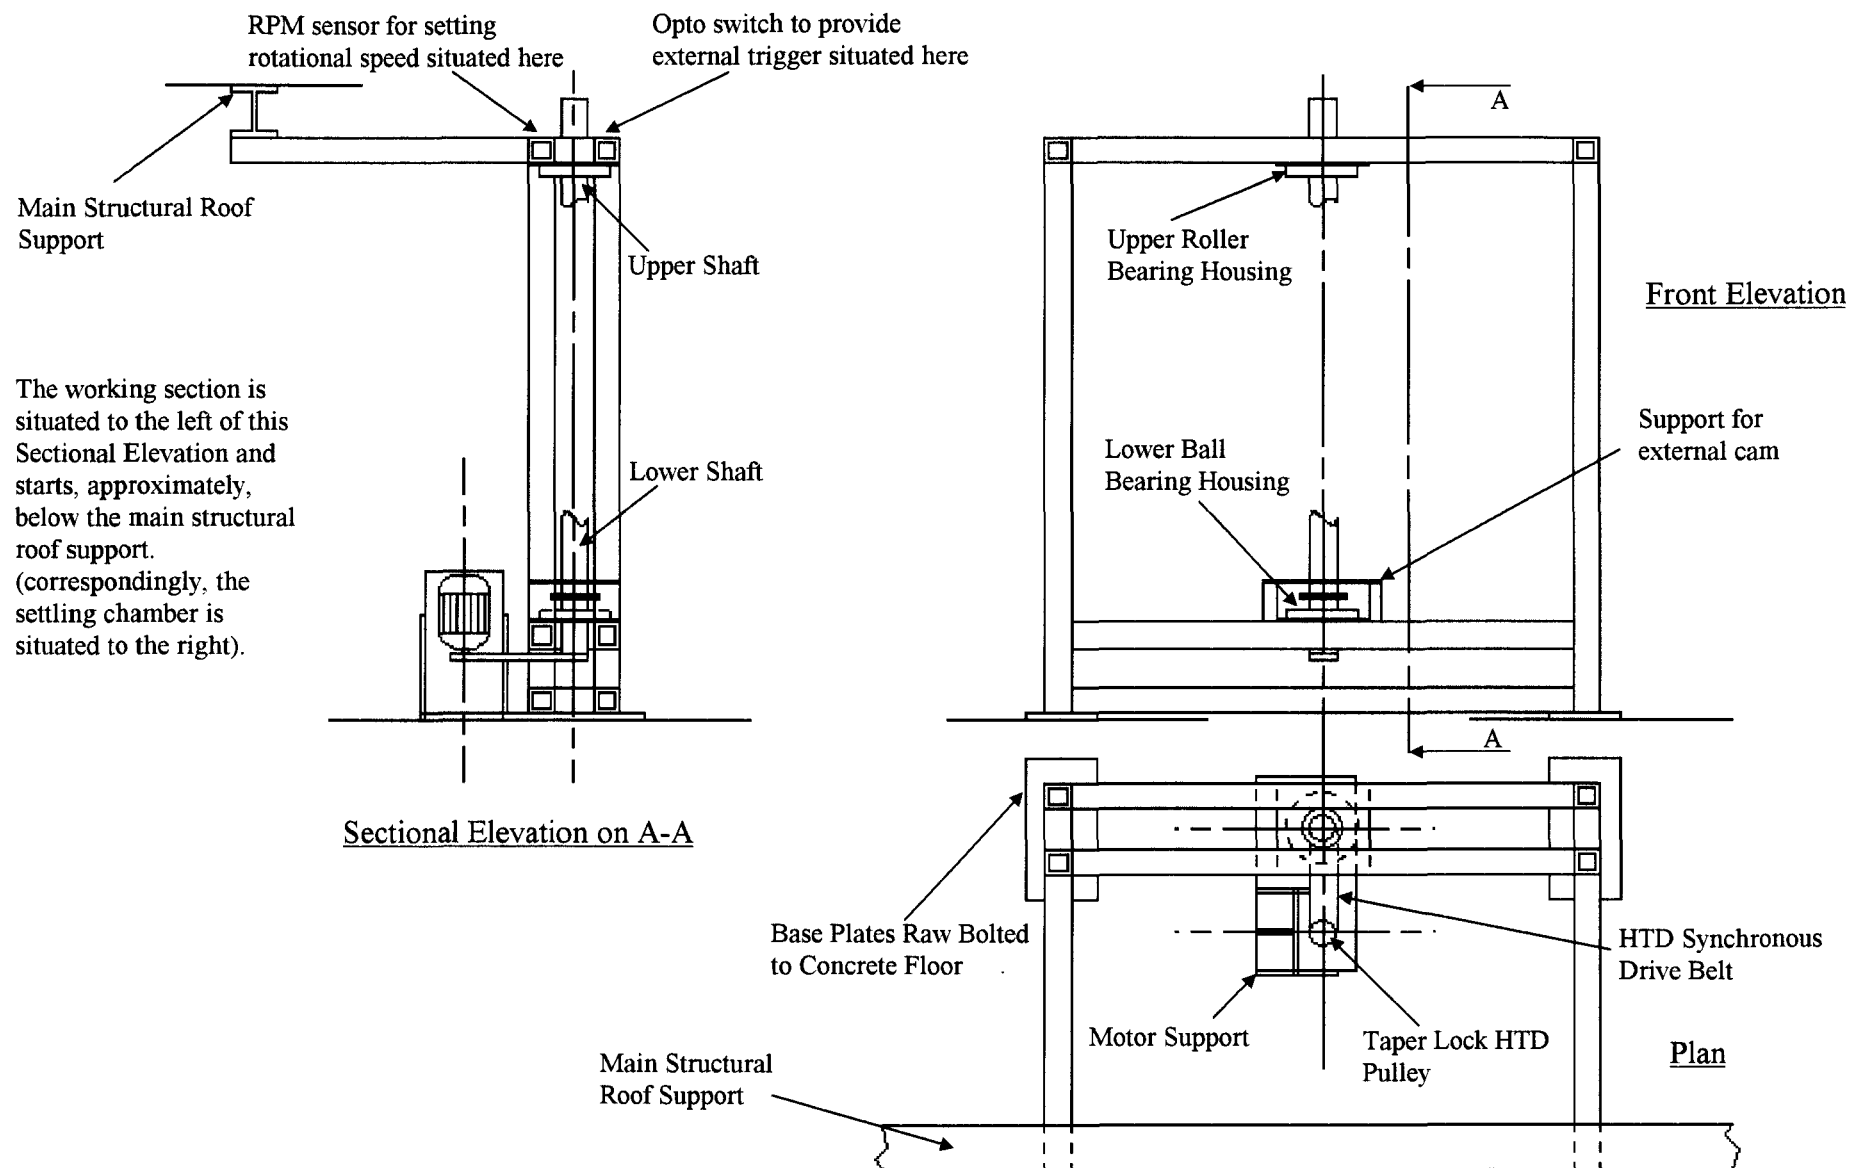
Drawing of rotating blade support structure illustrating motor support and position.
